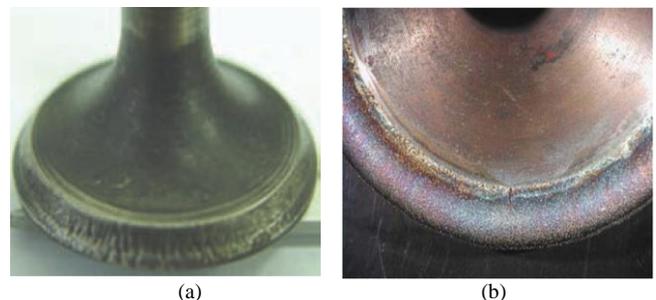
A view of engine valve face: (a) Erosion wear (22); (b) after LC (23)
